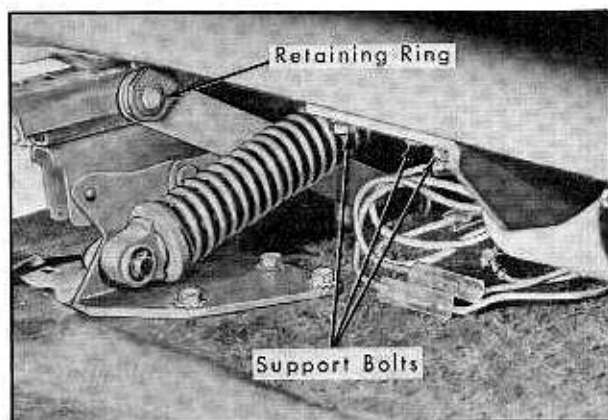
Detaching Horizontal Equalizing Rod Links (Sedans)
